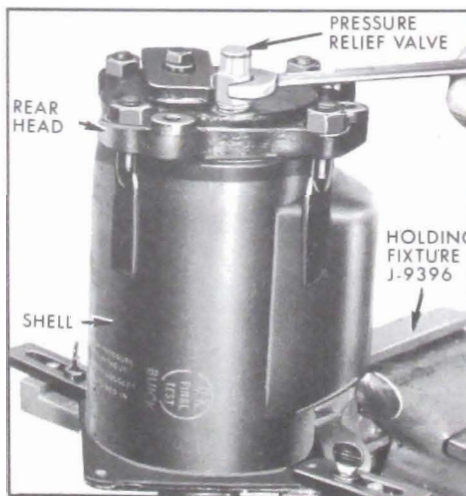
Removing Pressure Relief Valve (V-6 Engine Compressor Shown)
